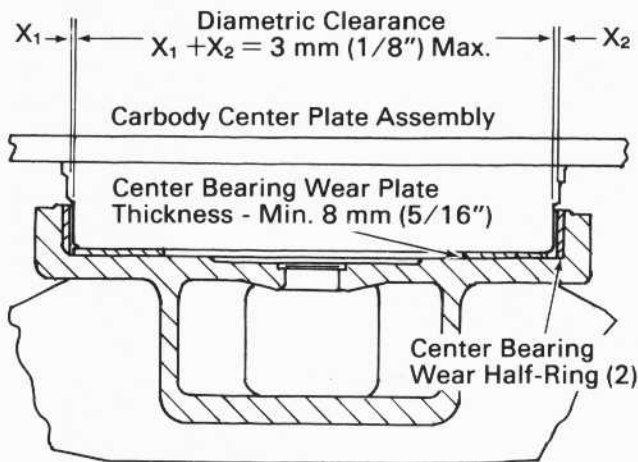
Center Bearing Wear Plate And Wear Half-Ring Limits
